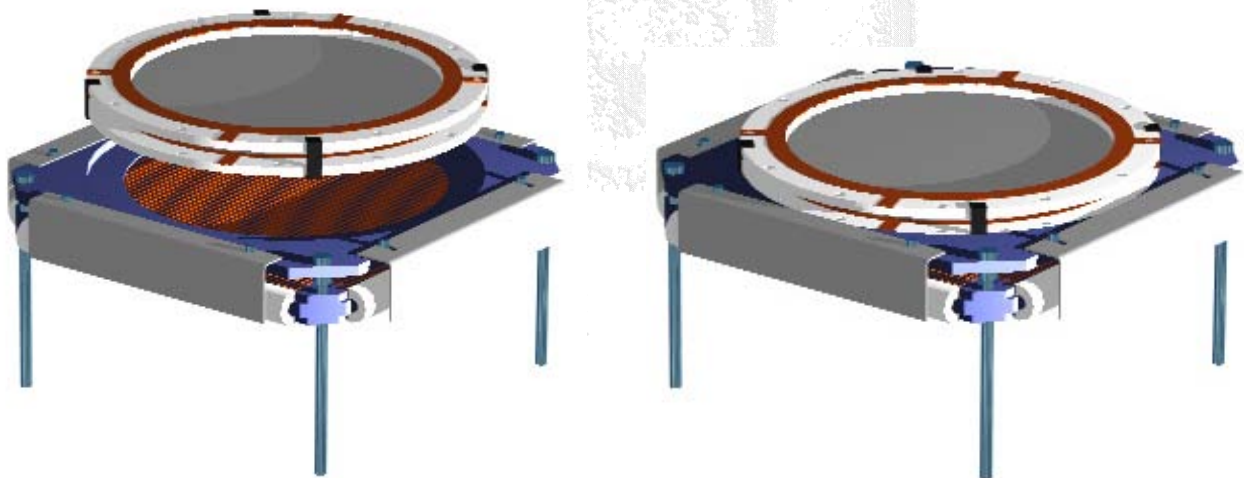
mounting of the metal mounting plate (shown is the similar mounting of a delay line anode)
